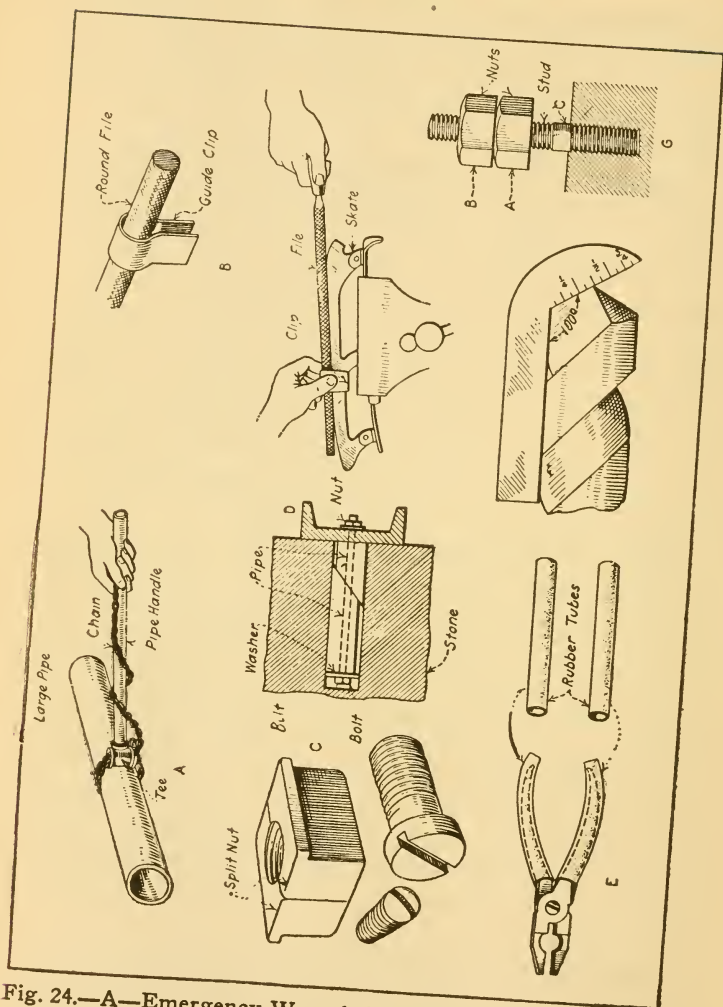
A—Emergency Wrench for Unscrewing Large Pipe. B—How to File Skate Blades Concave. C—Vise Jaw for Holding Screws Without Marring Threads. D—Simple Expansion Bolt. E—Insulated Handle Pliers. F—Use of Drill Gauge. G—How to Remove Stud Bolt.
